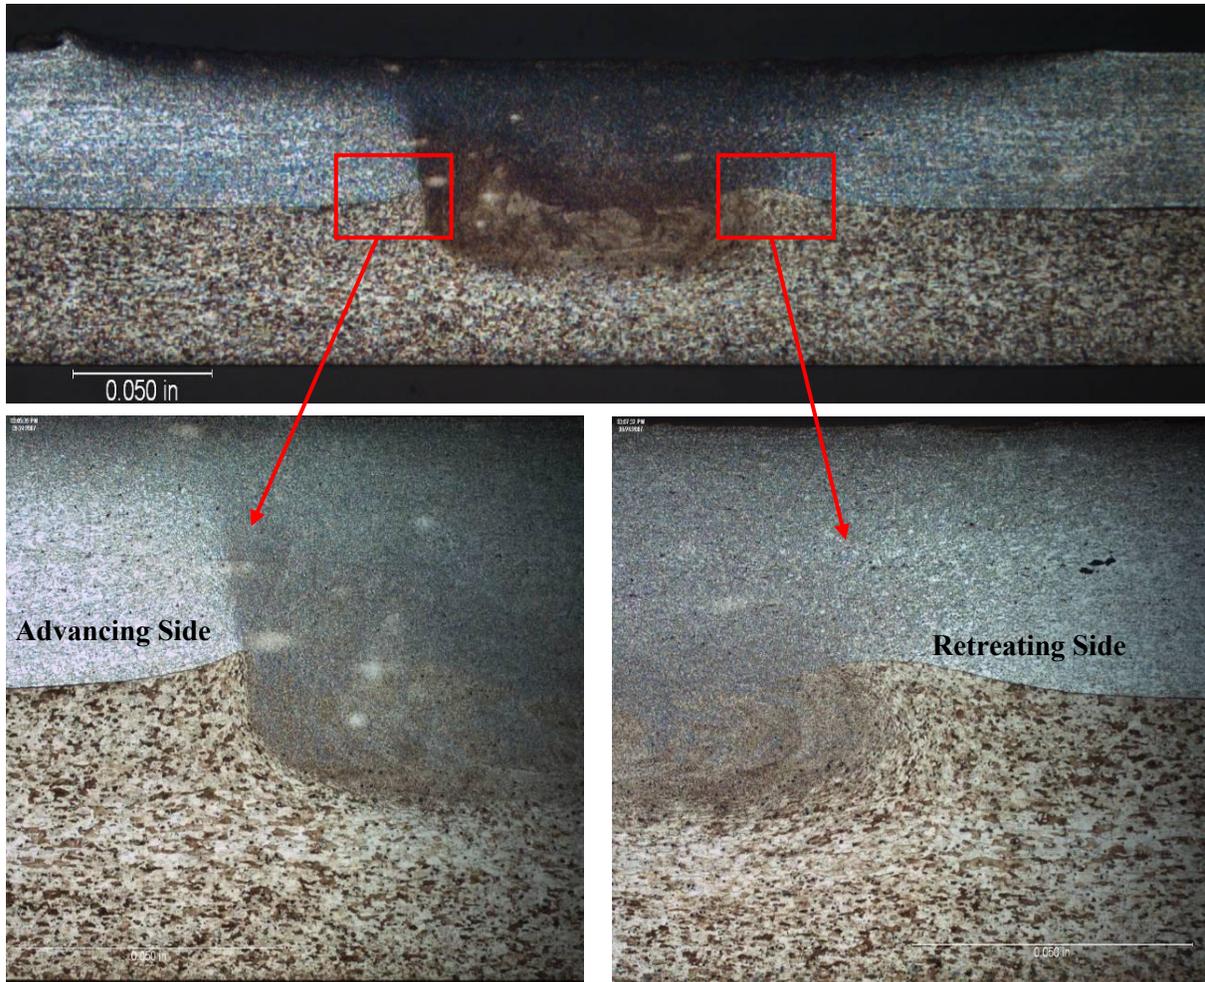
Micrograph of the weld nugget of the counterflow™ tool [40]
